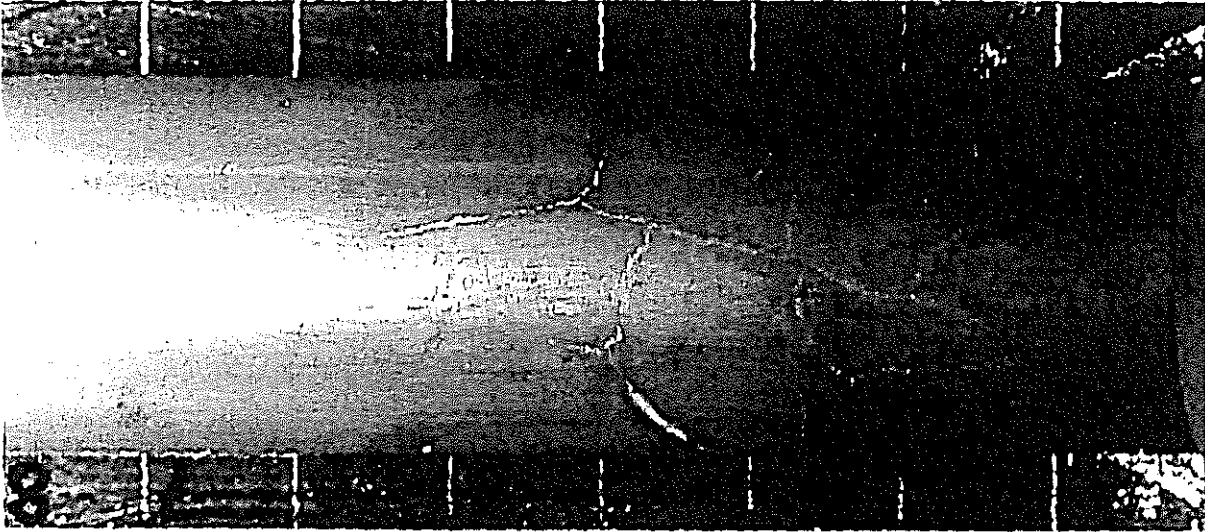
Cylindrical test piece made of 316L(N) steel, example of cracks observed after test at frequency 0.3Hz
